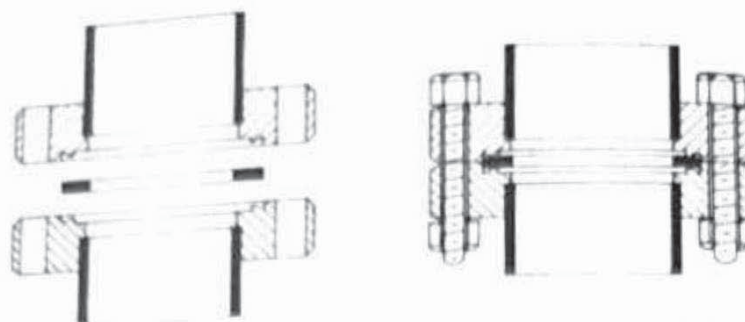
Knife-edge metal-to-metal UHV seal using an annular copper gasket. The left-hand diagram shows two identical flanges with circular knife-edges, and the gasket between them, before the seal is made. On the right the flanges have been clamped together and the gasket has been compressed against the inner walls of the recesses on the flanges by the action of the opposing knife-edges. The seal is made on the outer (sloping) surface of the knife-edge. This type of seal is also known as the Conflat® seal
